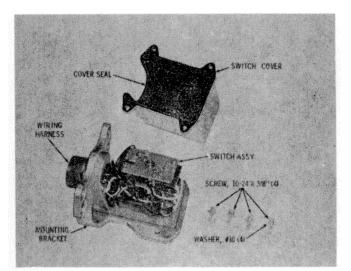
Mounting Bracket, Switch Assembly and Cover
